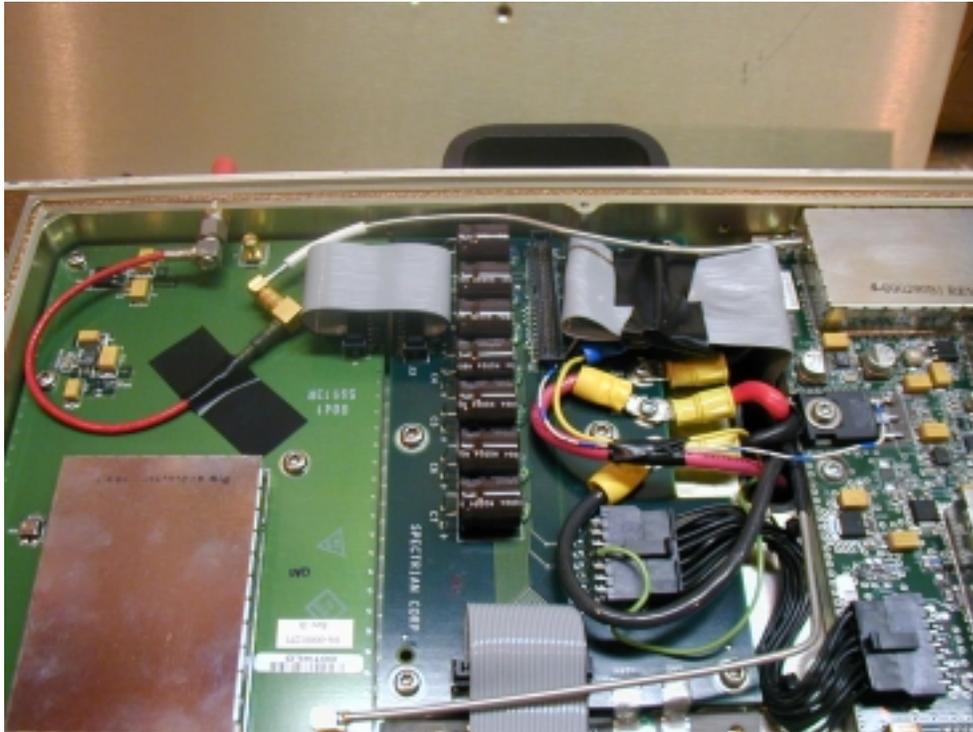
View of RF input connections (a female-to-female sma bulkhead connector mates with a right-angle sma-male connector on a red jumper cable; the smc-female connector on the other end of that cable mates with the MCX-male connector on the original jumper cable to the RF driver board).
